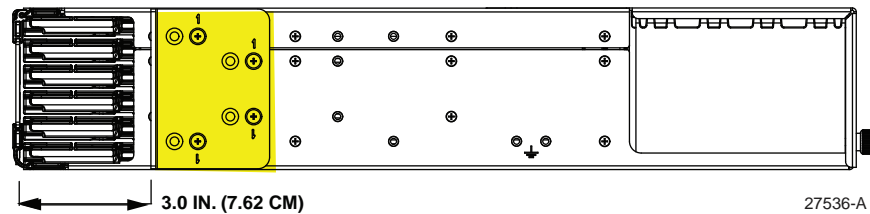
Rack Mounting Position for 3.0-Inch Recess (Shipped Panel)
